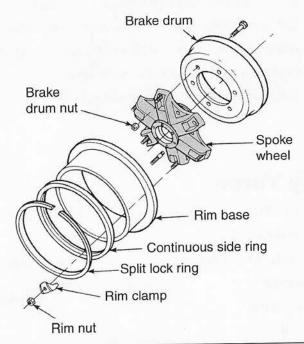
Components of a cast spoke wheel and multi-piece rim. (Courtesy of Daimler Trucks North America)
